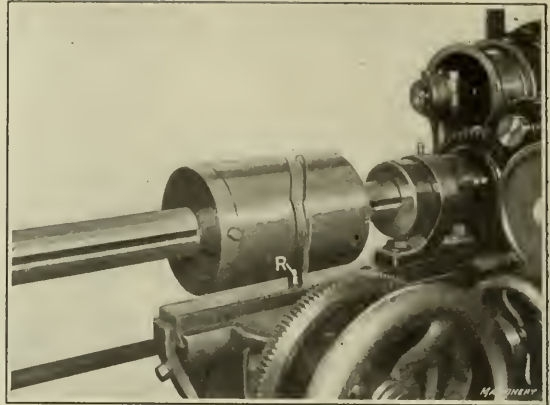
Cam controlling machining of Helical Oil-grooves in Saddle
